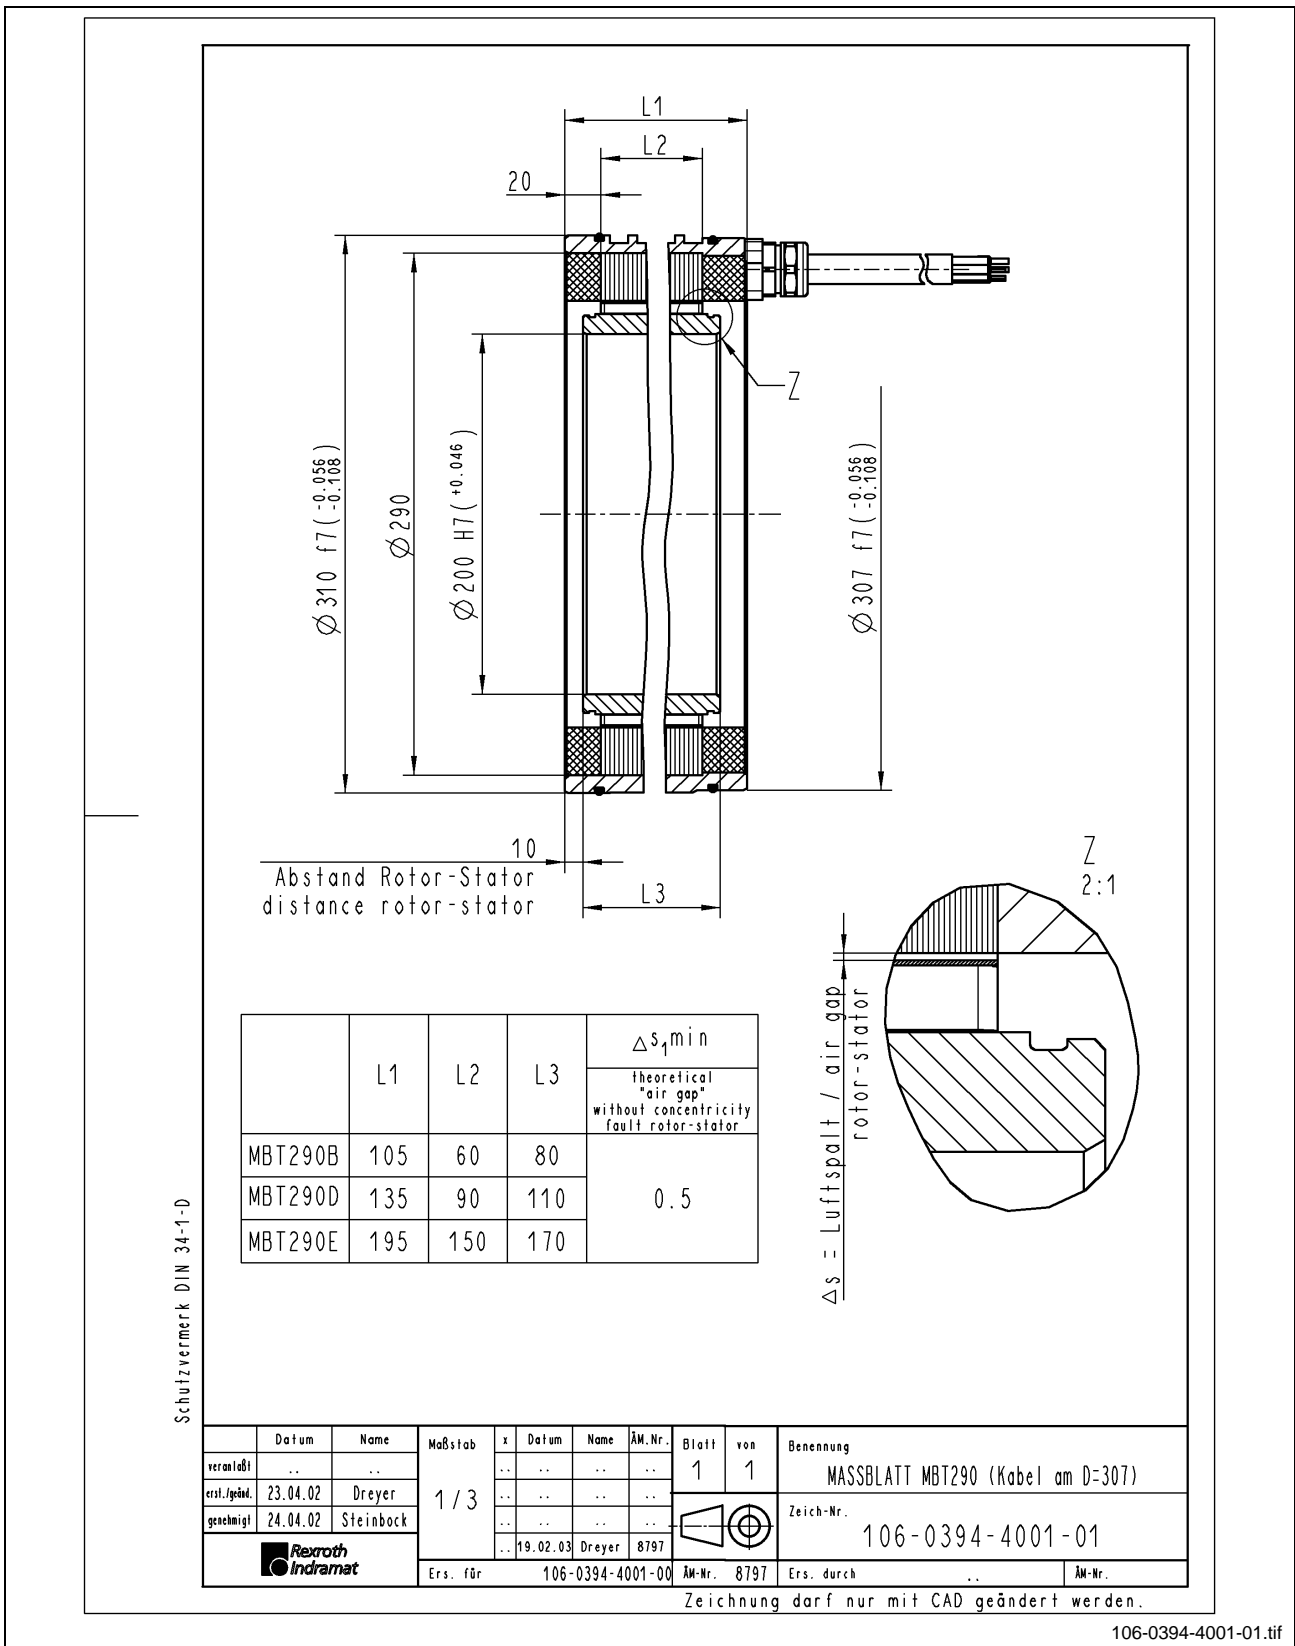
Dimension sheet size 290, electrical connection "SN"
